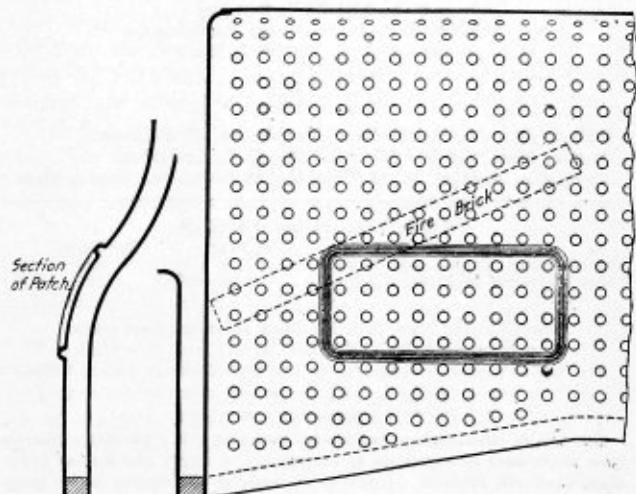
SHOWING PATCH WELDED ON FIRE-BOX BEFORE U WAS HAMMERED DOWN.
